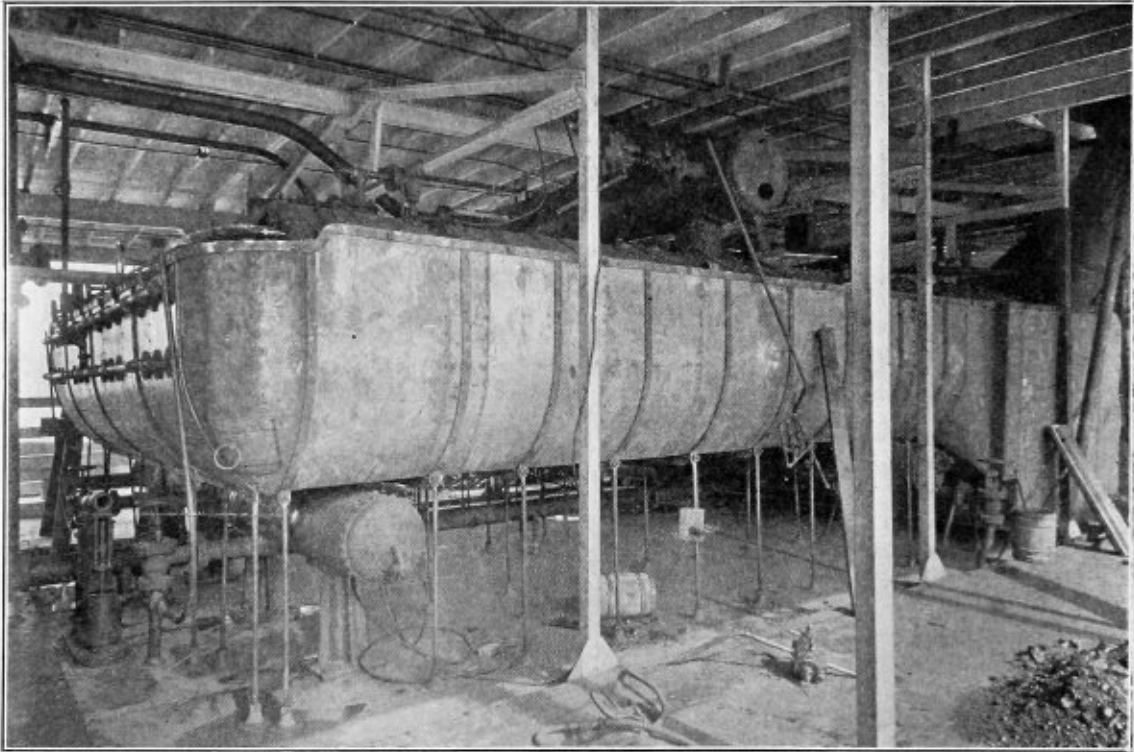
SIDE VIEW OF THE BOILERS ON THE WESTERN RIVER PACKET, S. S. BROWN.
